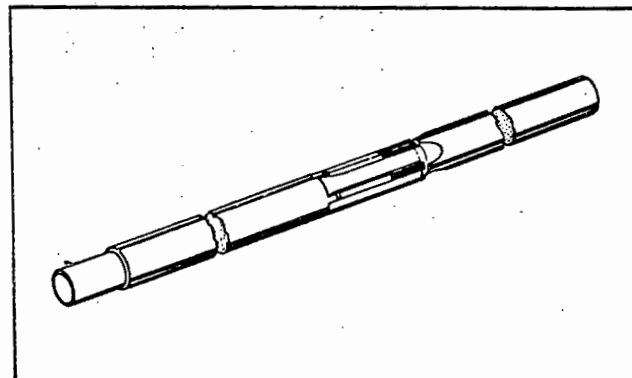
T26823 Throttle Shaft Bushing Finish Reamer
